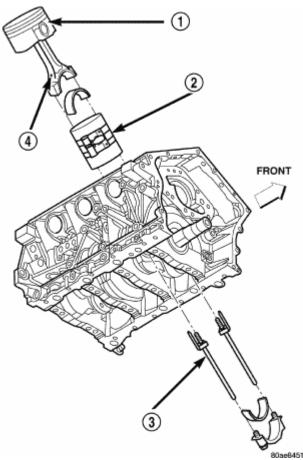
Piston & Connecting Rod Courtesy of CHRYSLER LLC
